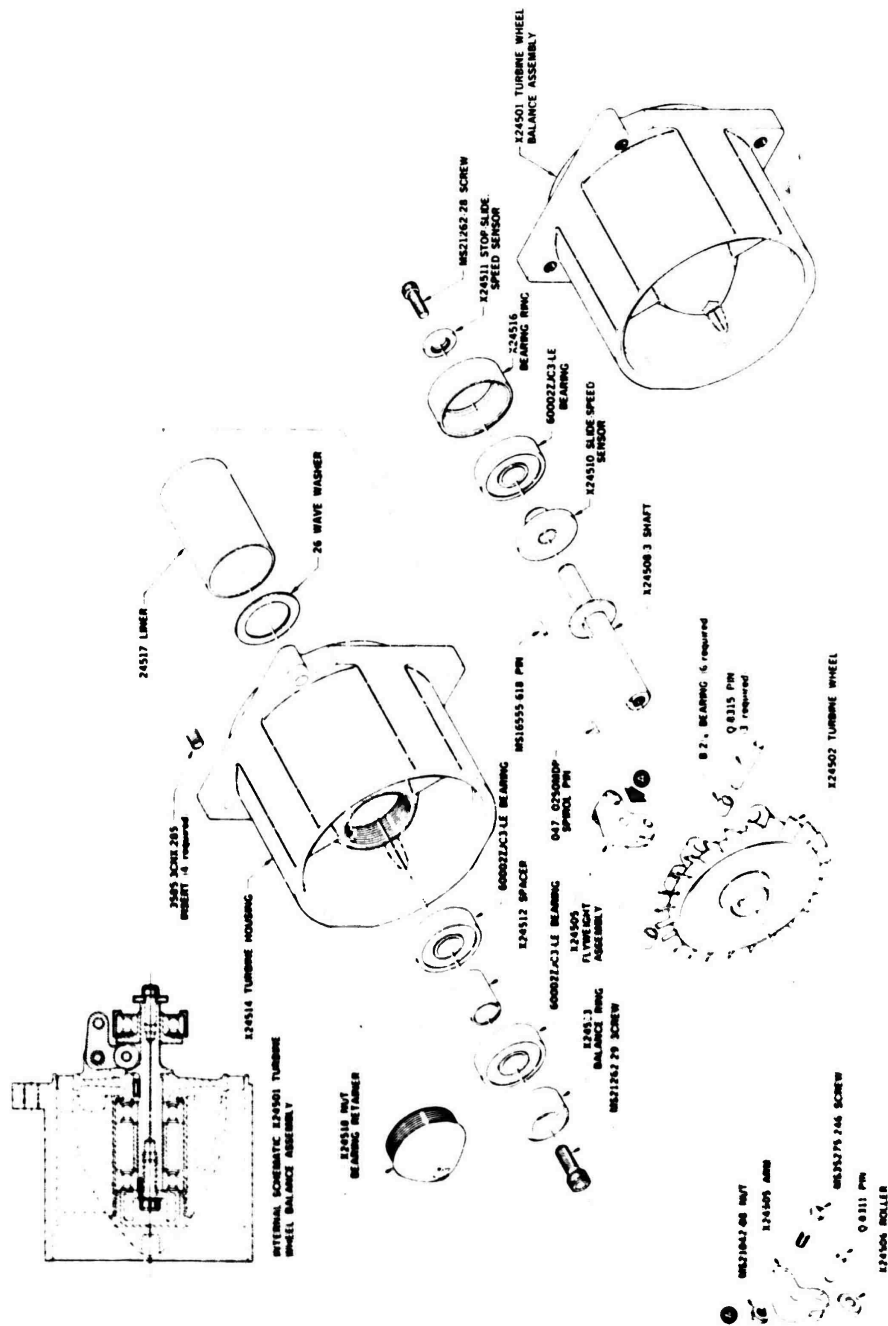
PHASE II TURBINE WHEEL BALANCE ASSEMBLY
